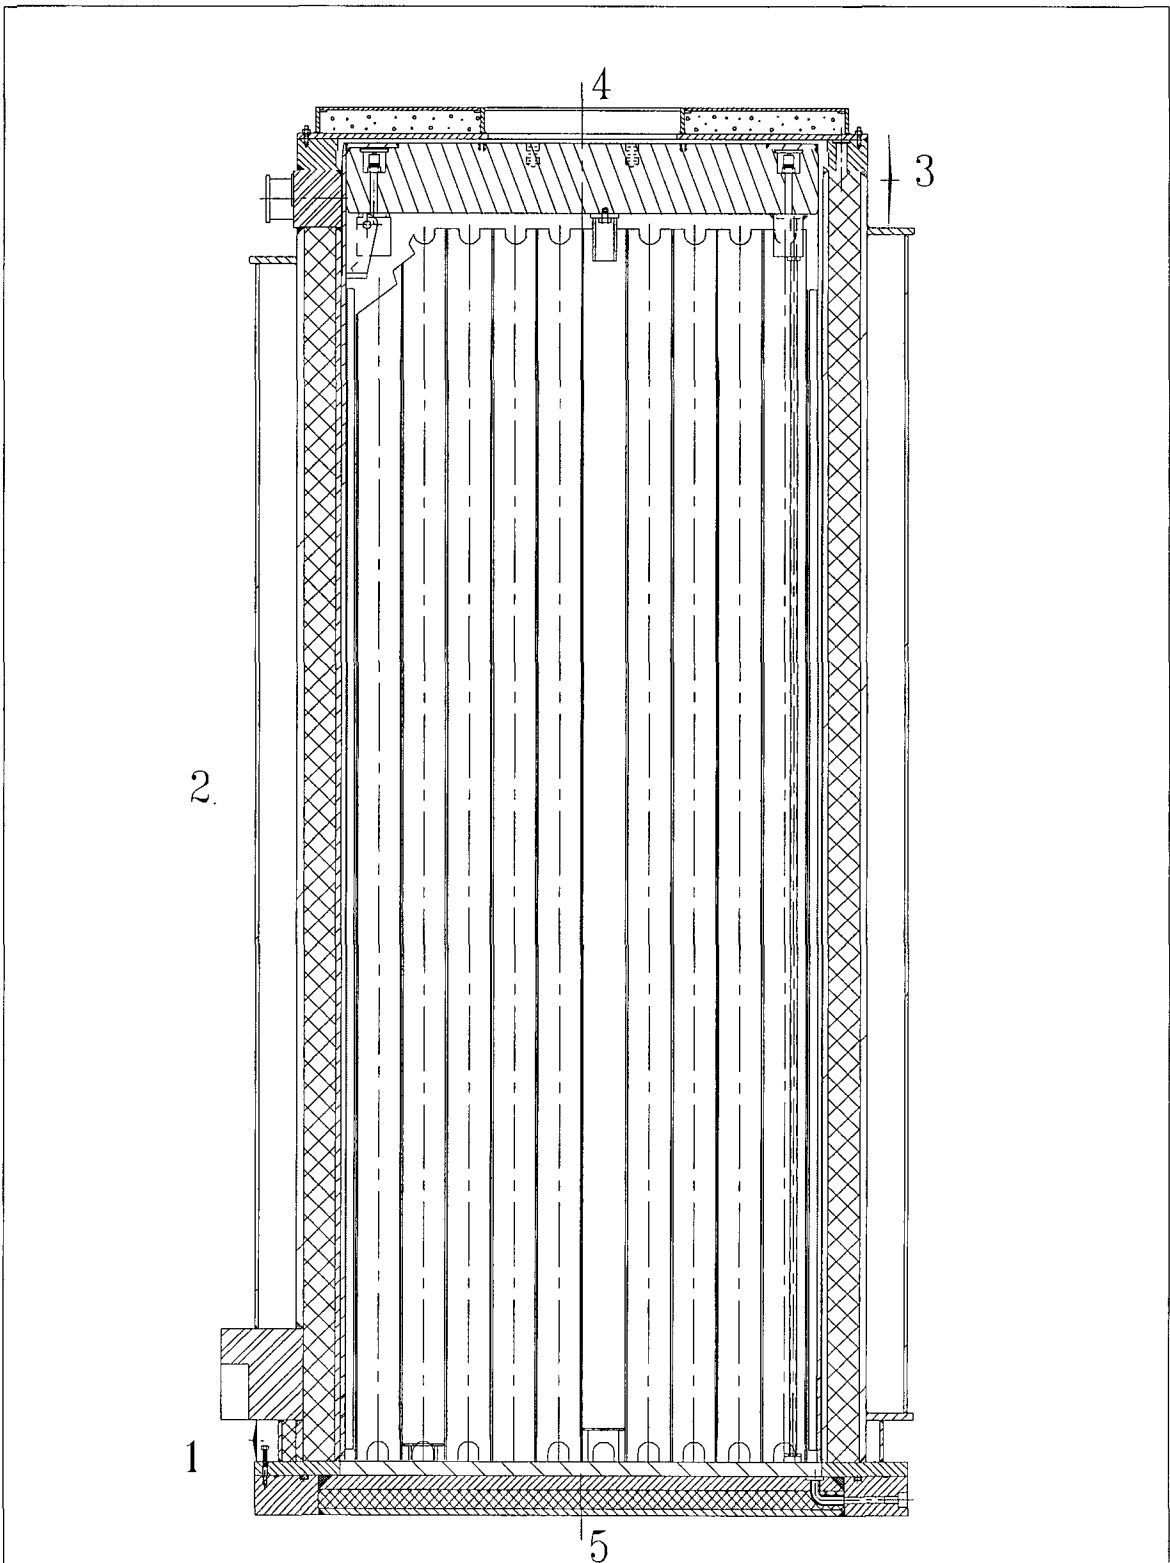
; CROSS SECTION ELEVATION VIEW OF 125 TON HI-TRAC TRANSFER CASK WITH DOSE POINT LOCATIONS
